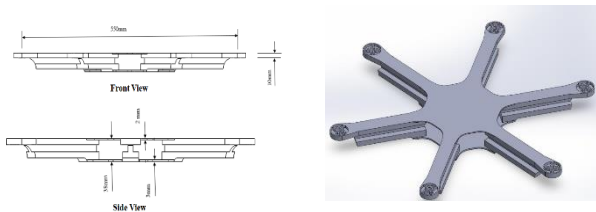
Front, side, and isometric view of I cross-section arms drone
